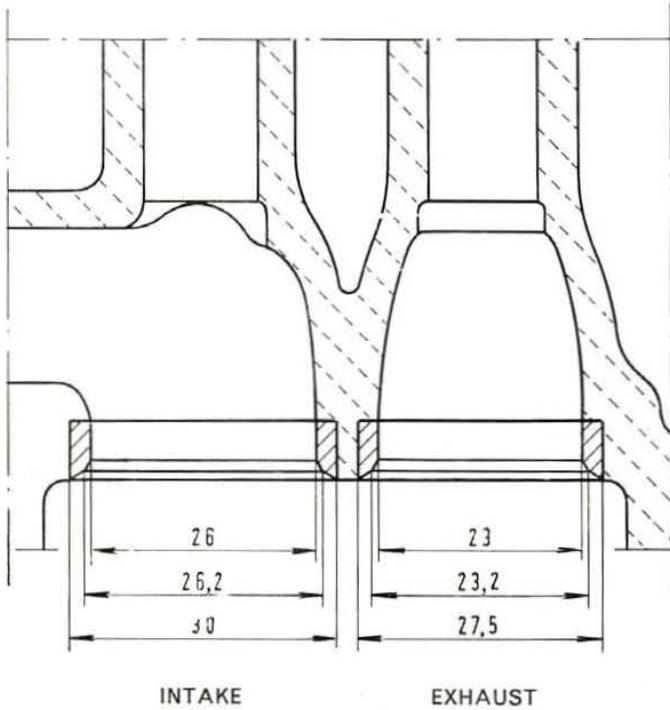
Diameters of intake and exhaust valve seats in head.
